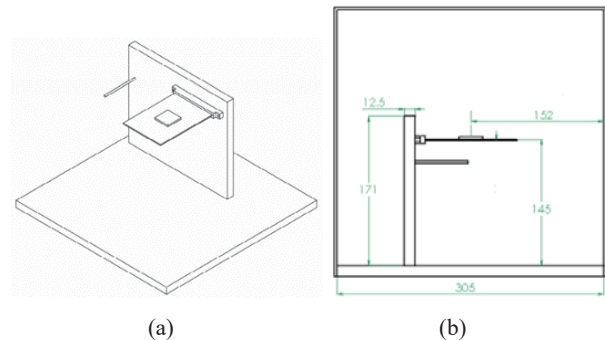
Test enclosure and fixture assembly for diode for measurements (JESD51).
